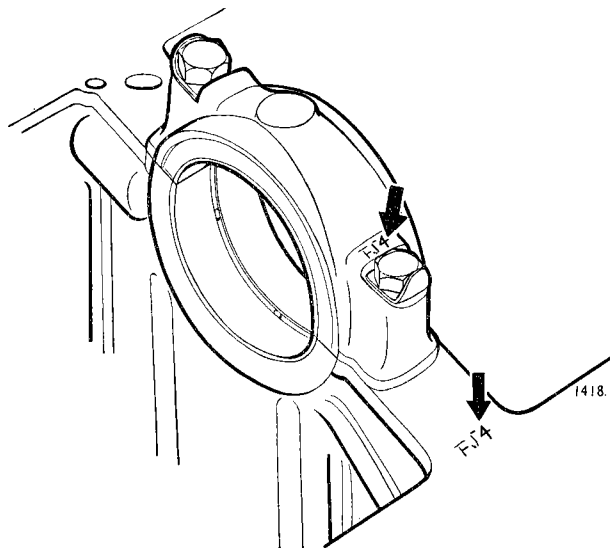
Showing the corresponding numbers on the main bearing cap and the crankcase
